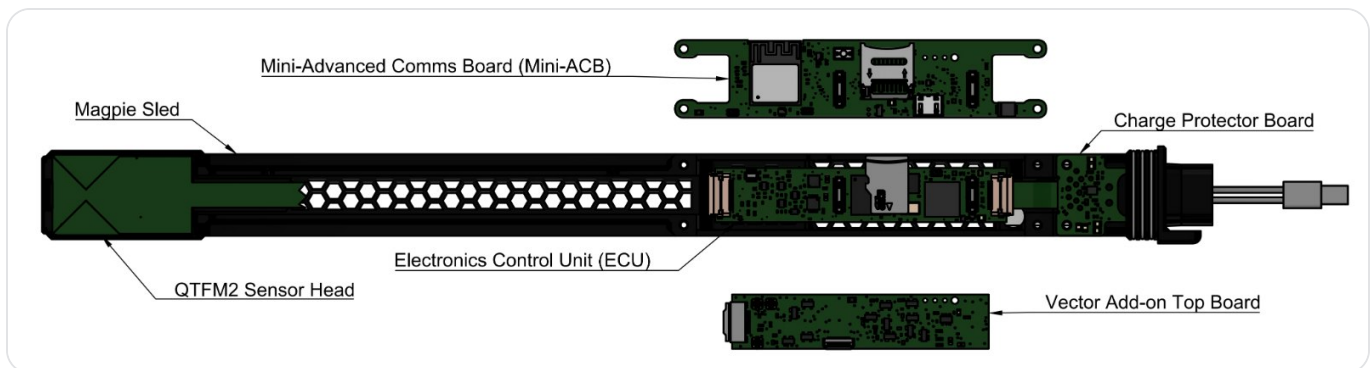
Magpie component breakout: the sled and QTFM2 sensor head along the body, with the Mini-Advanced Comms Board (MiniACB), Electronics Control Unit (ECU), charge protector board, and Vector add-on top board.
